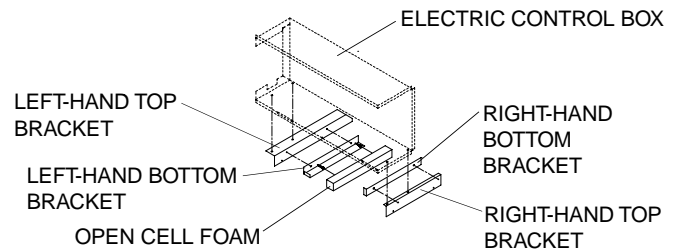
RIGHT AND LEFT-HAND BRACKET ASSEMBLY
